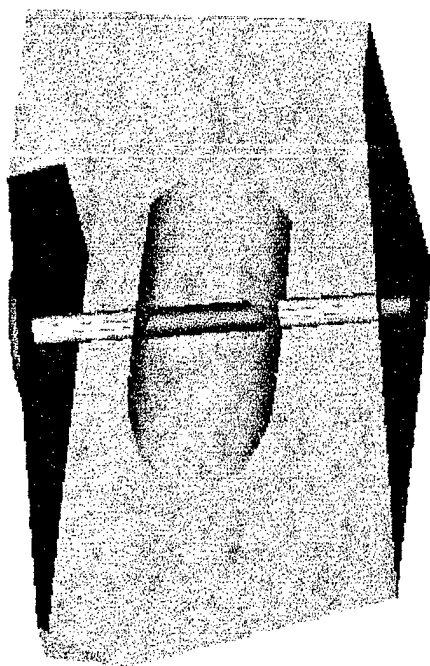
Main Strut Mounting Block 3D Cut-Away View
